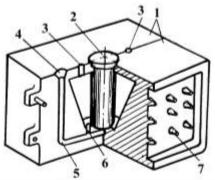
Metal (chill) mould: 1-half-moulds; 2-core; 3-gas relief sprue; 4-pouring basin; 5-downgate; 6-ingate (runner); 7-dowels for high-rate heat removal
